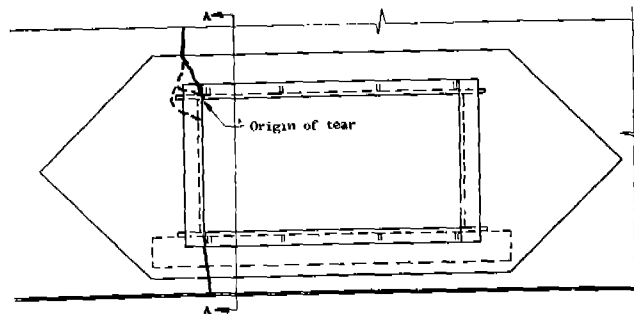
Details of square cornered cleanout door in failed crude oil storage tank
